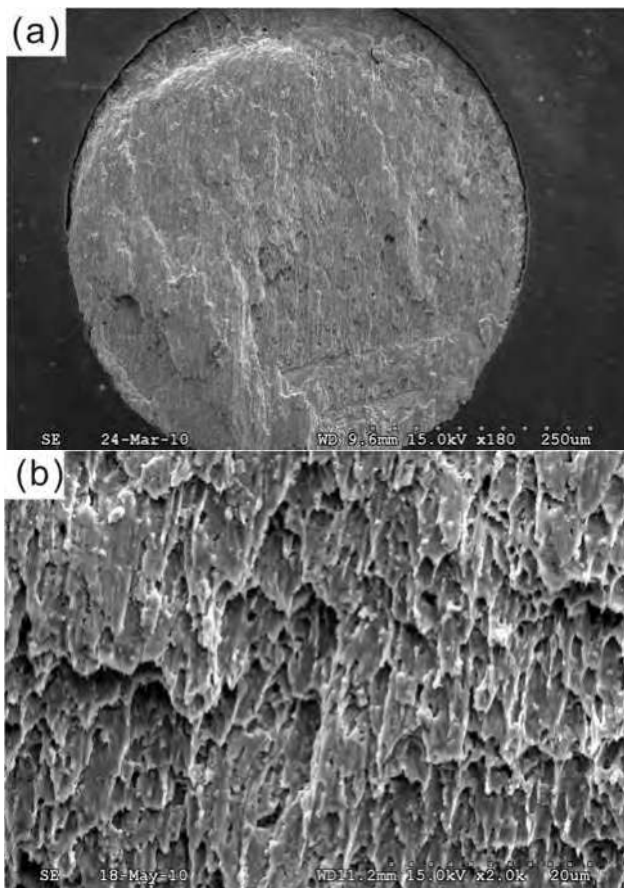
Fractography of the Sn3.5Ag0.5Cu-1TiO₂ nano-composite solder joints in BGA packages after ball shear tests [58].
